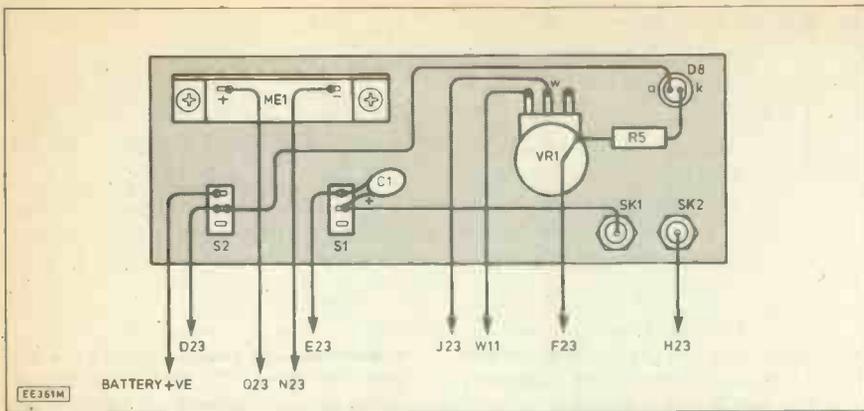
Interwiring between the front panel mounted components. Note that resistor R5 is soldered to the "metal" body of potentiometer VR1.
